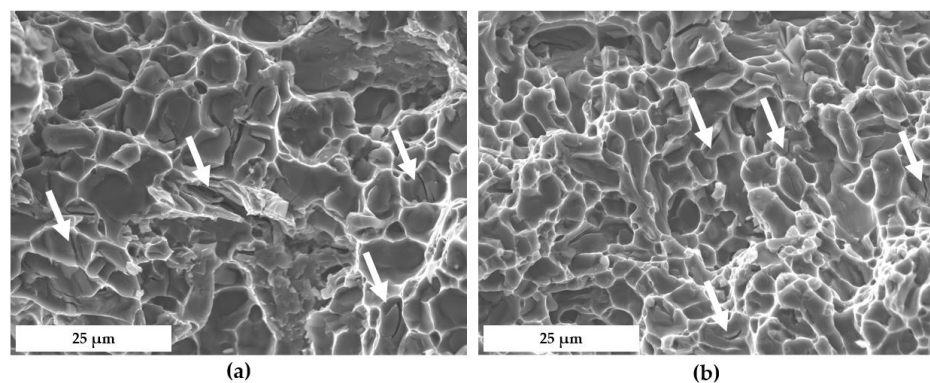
SE micrographs at high magnification showing the details of cracked eutectic Si particles on the fracture surfaces of tensile specimens in (a) ST1 and (b) ST4 conditions.
